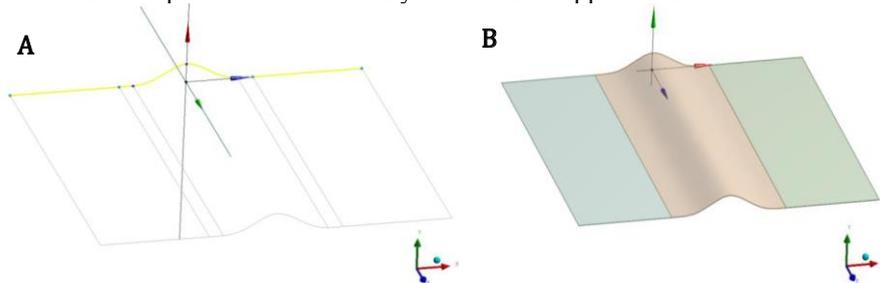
A - Making the membrane surface; B - Making solid model of the membrane with a single ply.
